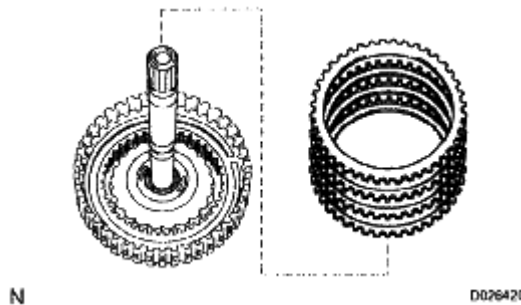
Removing Flange, Discs, Plates And Cushion Plate From Intermediate Shaft
